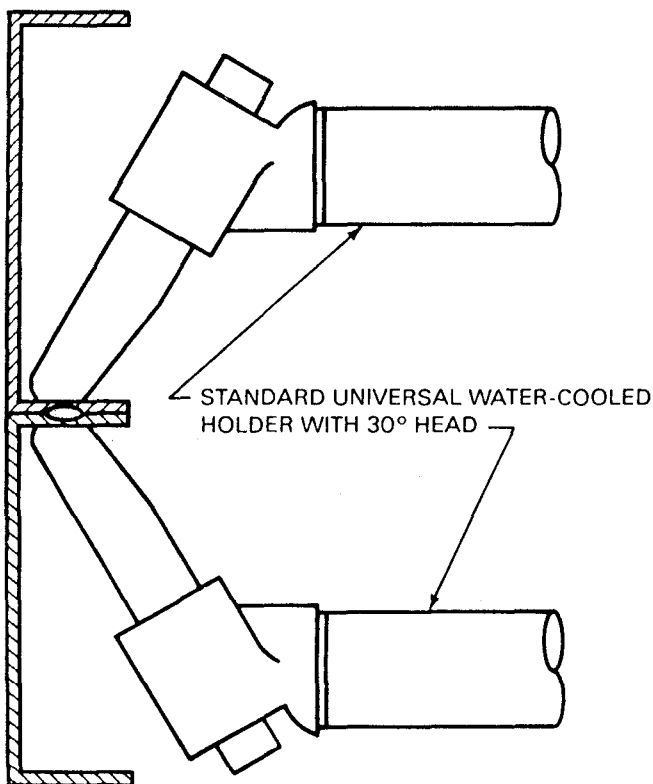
Special Spot Welding Electrodes with the Faces Angled at 30 Degrees
